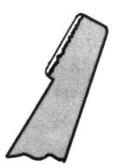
End of auxiliary quick-break blade showing erosion at acring tip
